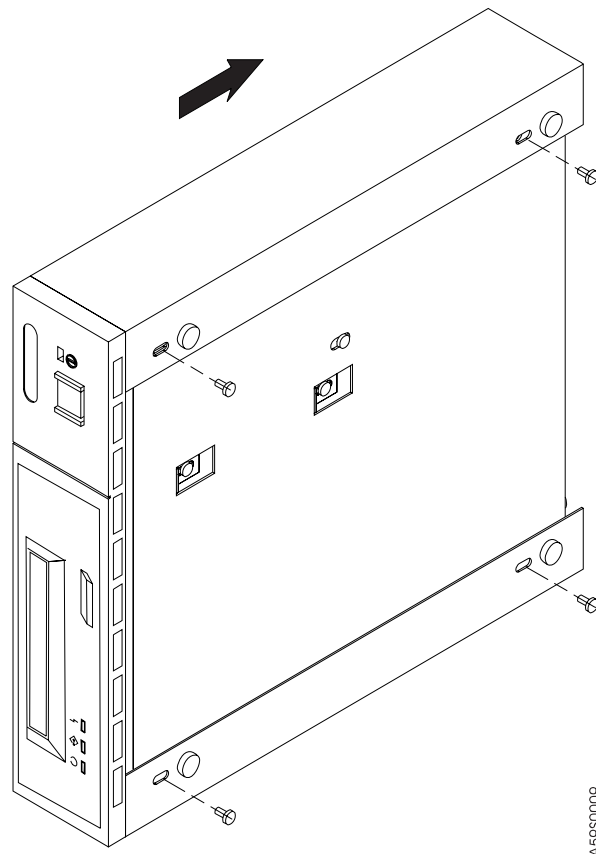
Removing and Replacing the Cover. The 7206 Tape Drive is shown tilted on its side.
